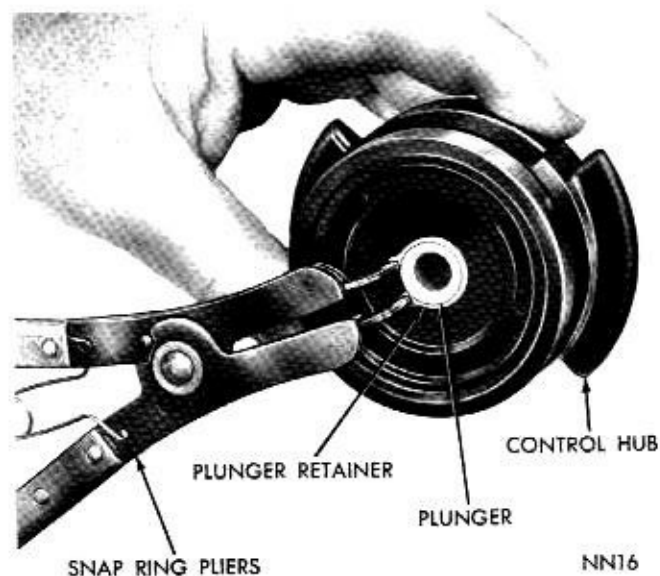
Removing the Control Hub from the Power Piston Assembly
